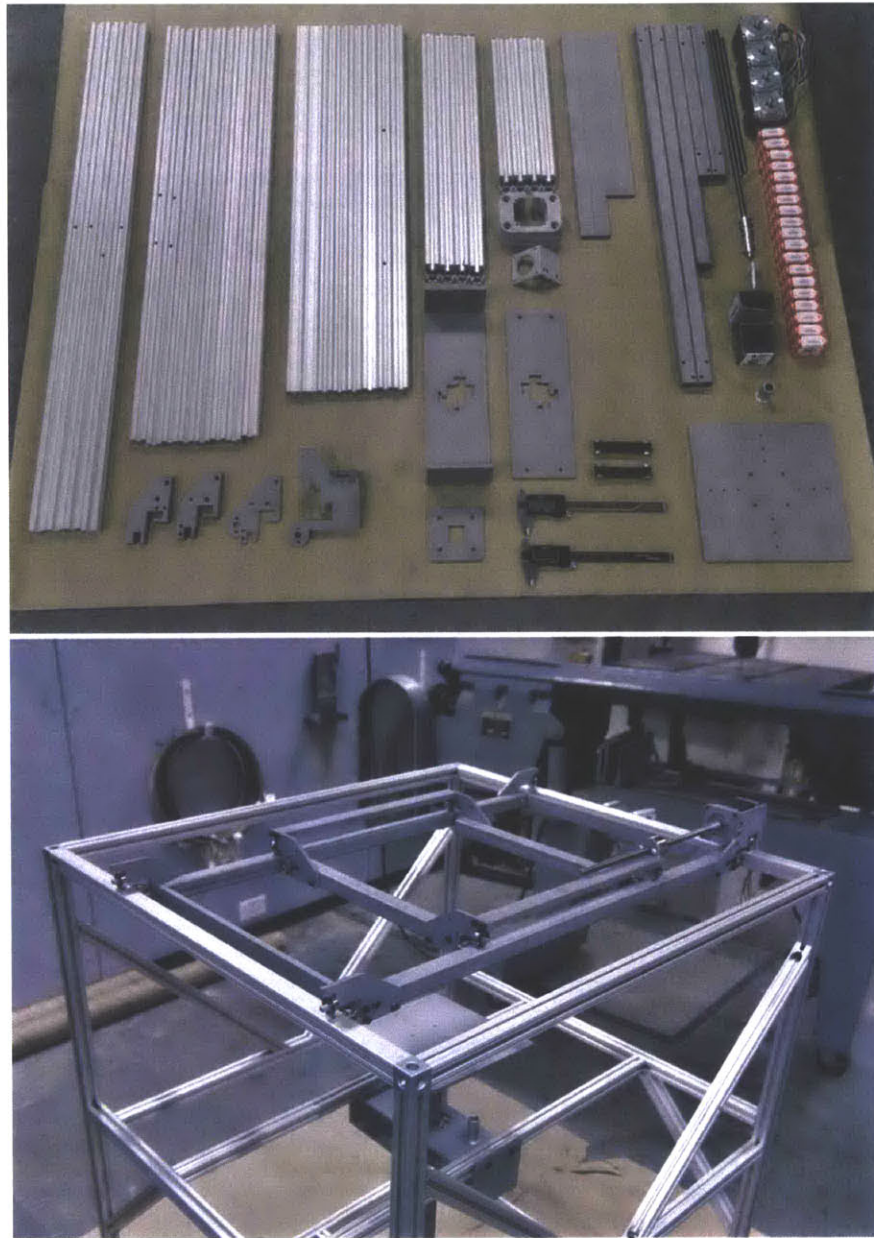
The assembled printer frame & carriage built in the Center for Bits and Atoms
